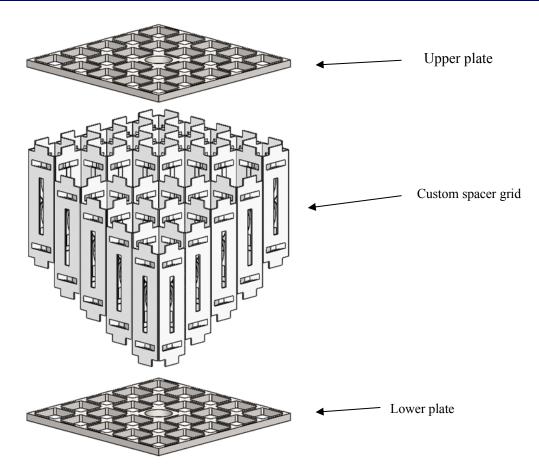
Exploded View of the Custom Spacer Grid Assembly
